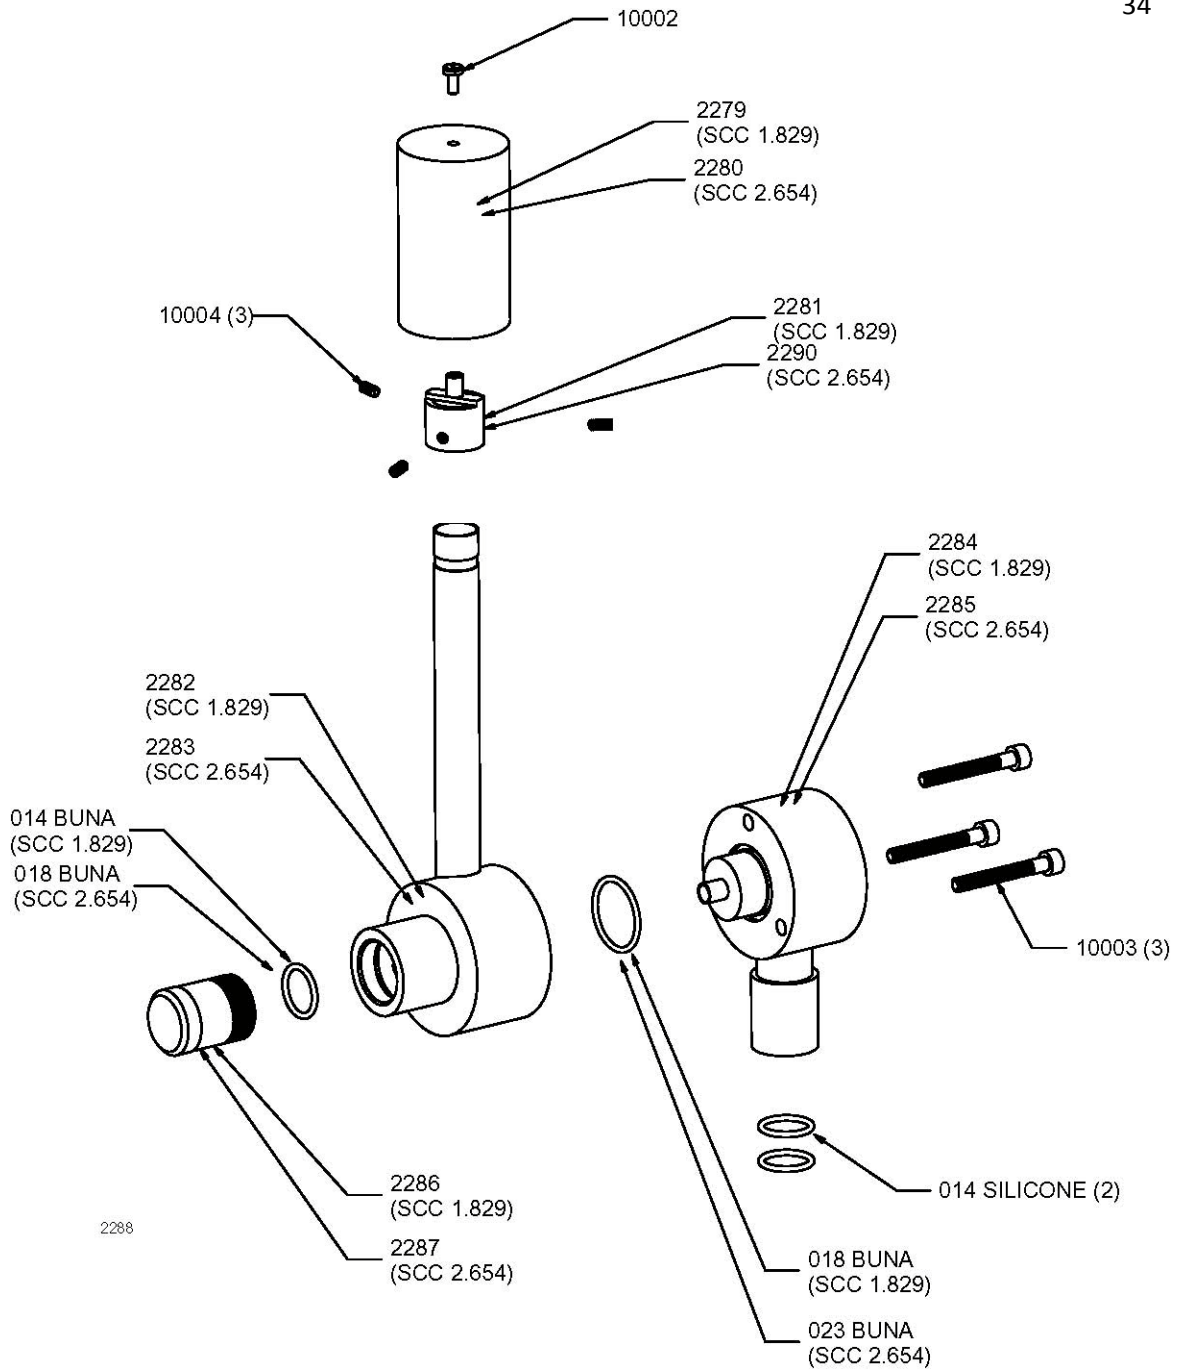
Exploded View of SCC 1.829 and SCC 2.654 Cyclones
